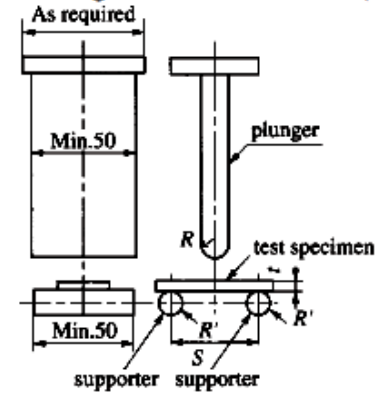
Jigs for Roller Bend Test (Unit: mm)
